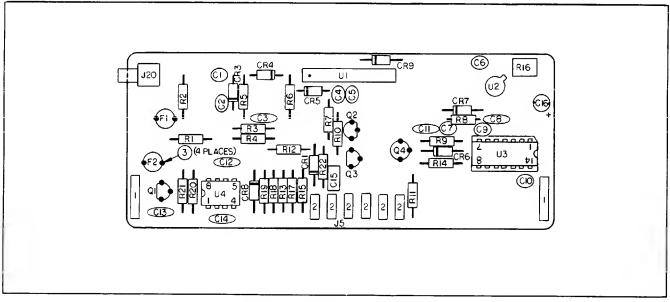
A9 520 MHz Prescaler PCB Assembly
